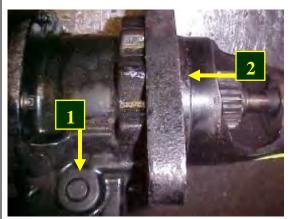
B. Painted shift lever pin (Ref. 1) and painted mounting collar (Ref. 2) indicate that this is a non-Remy rebuilt starter.
